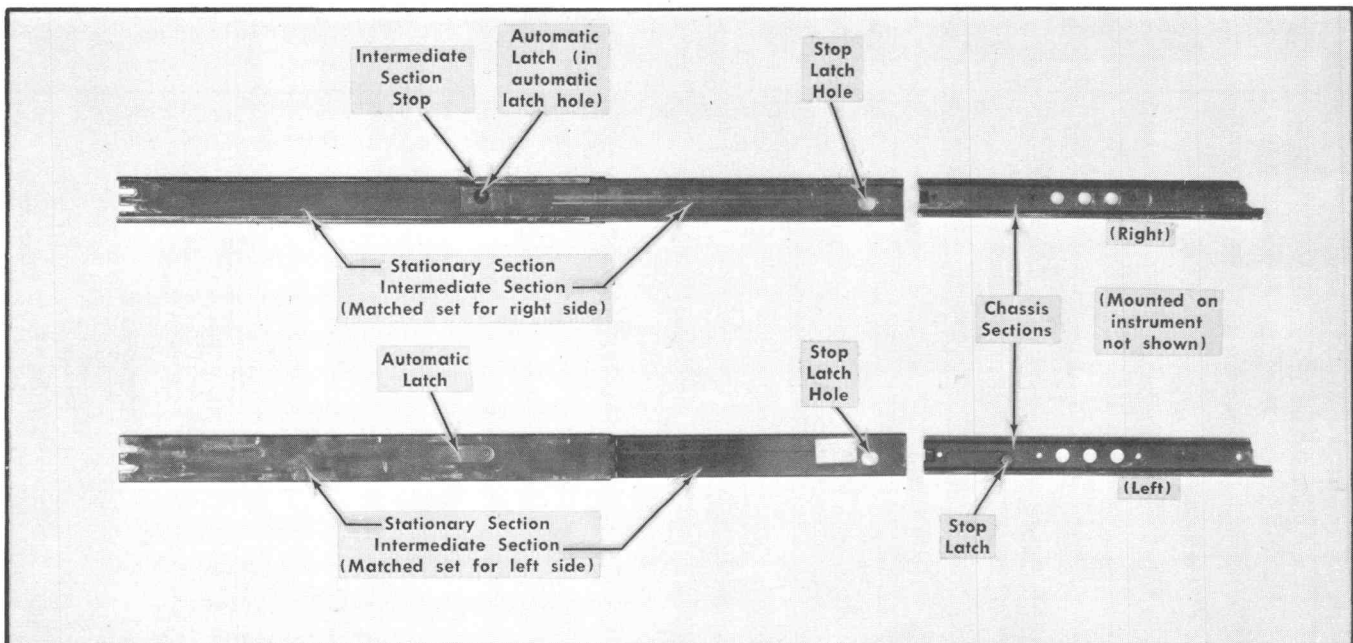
Illustration showing the 1 3/4-inch wide slide-out track assemblies.
